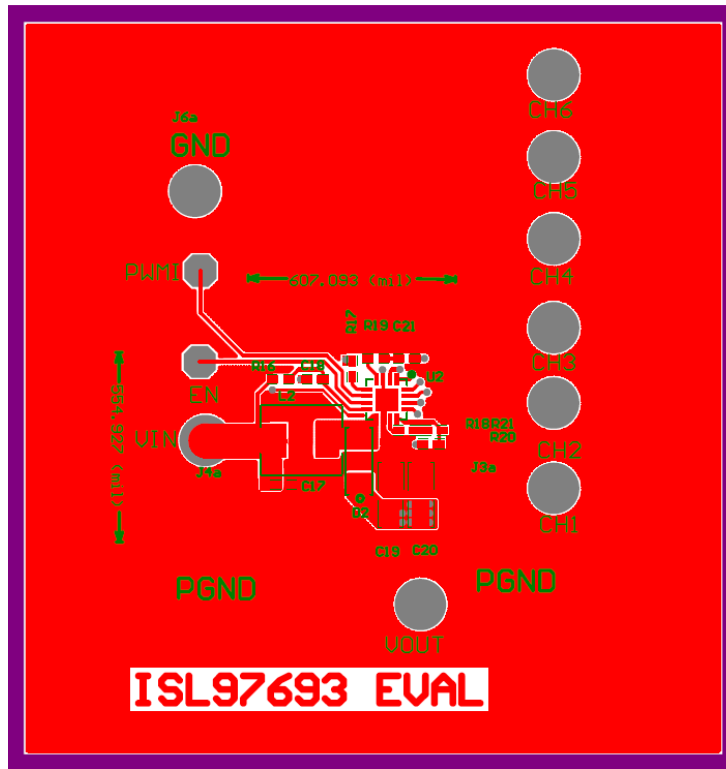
PCB LAYOUT (TOP LAYER) OF ISL97693IRTZ-EVALZ SMALL EVALUATION BOARD
